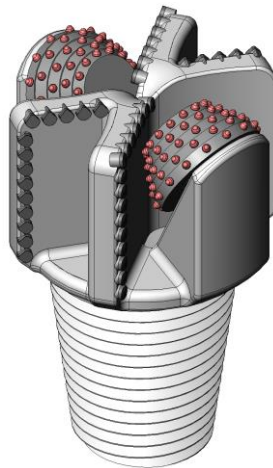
Final design isometric view – dual-cone hybrid drill bit
